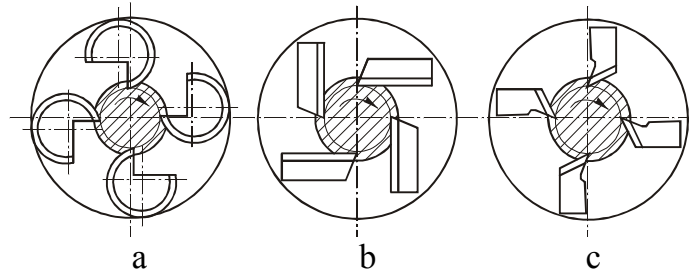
Thread whirling with thread-milling heads: (a) layout; (b) cutter design
